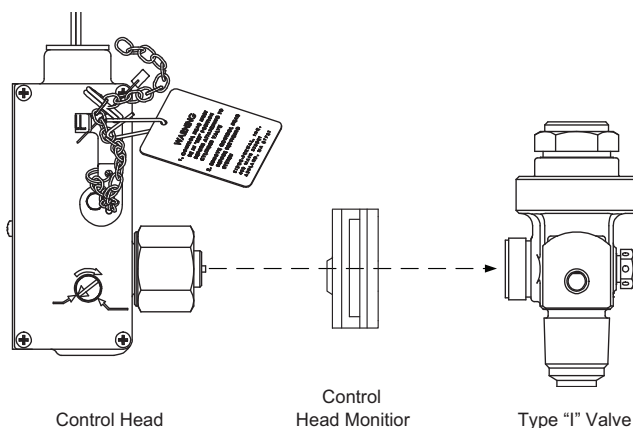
Control Head and Placements Supervision Component Installation to Type "I" Valve, Side View
